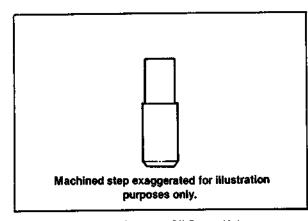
Stepped Oil Pump Valve Part No. 26400-82A
